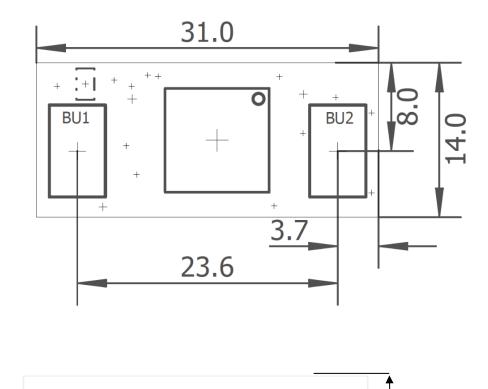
SMARTsat® OEM III Board Physical Dimensions (in mm)
